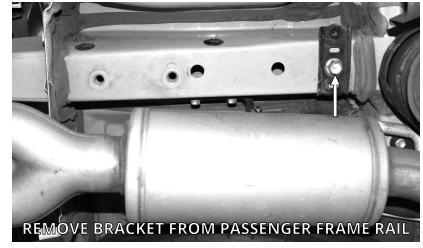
VIEW UNDER THE REAR OF THE VEHICLE
